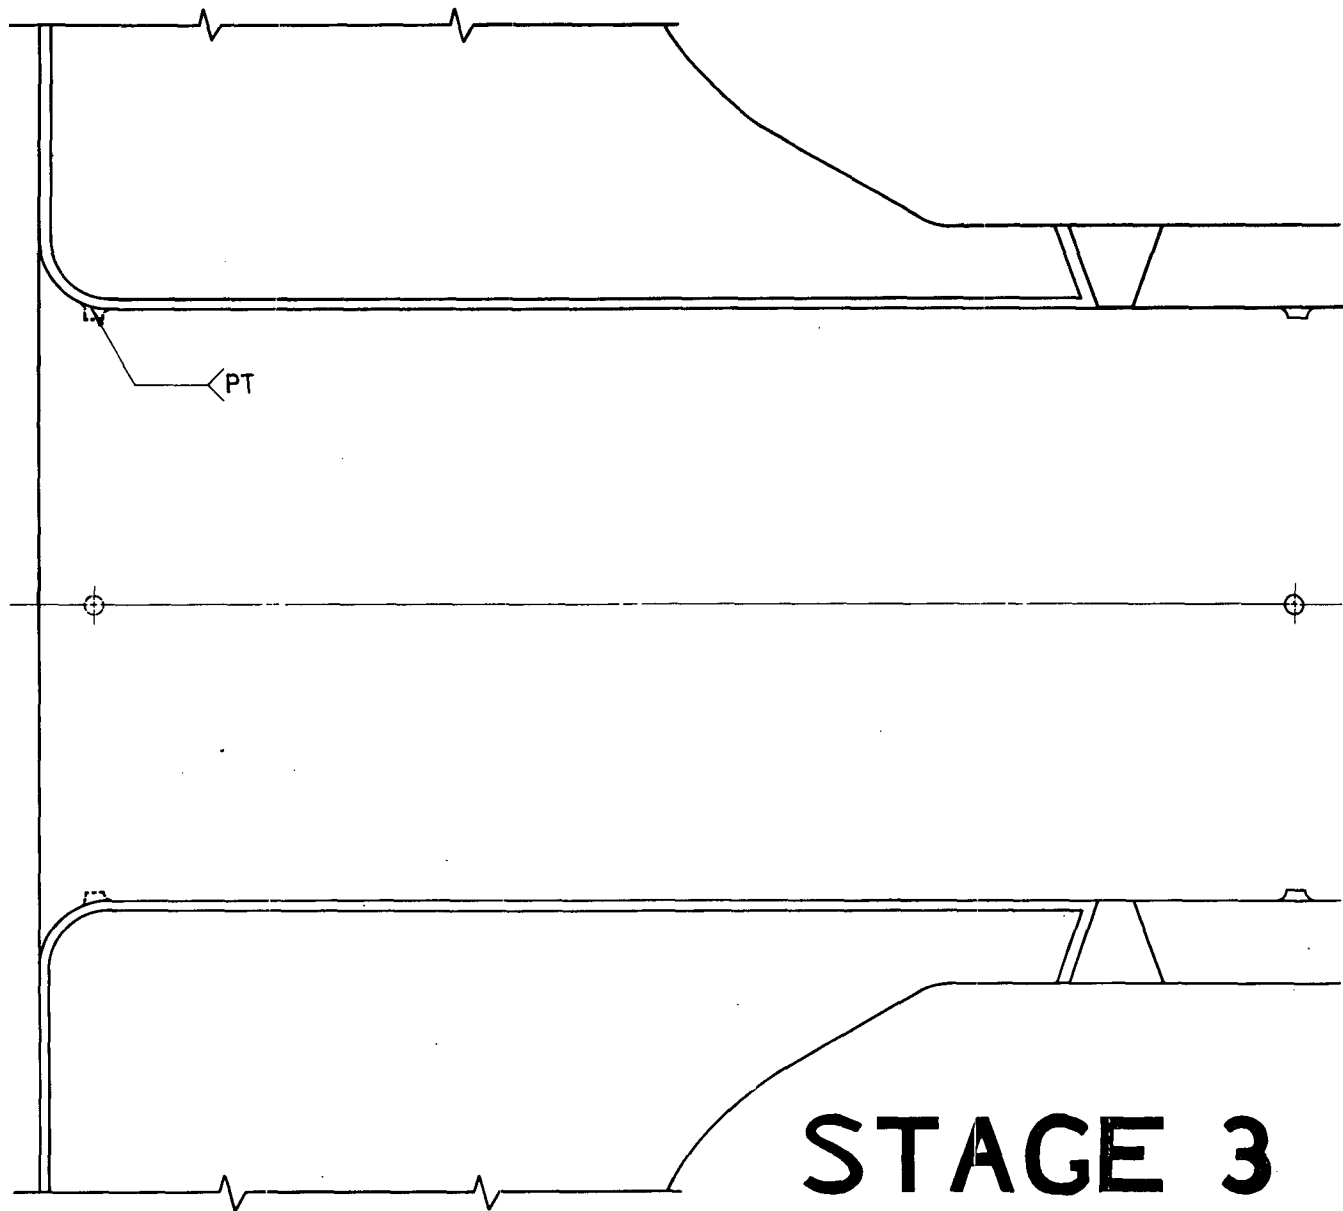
CORE FLOODING NOZZLE WELD PREPARATION PRIOR TO INSERTING MODIFIED INSERT
